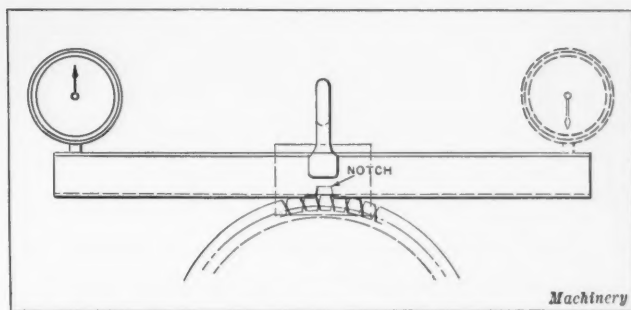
Arrangement for aligning Staggered Herringbone Gears
